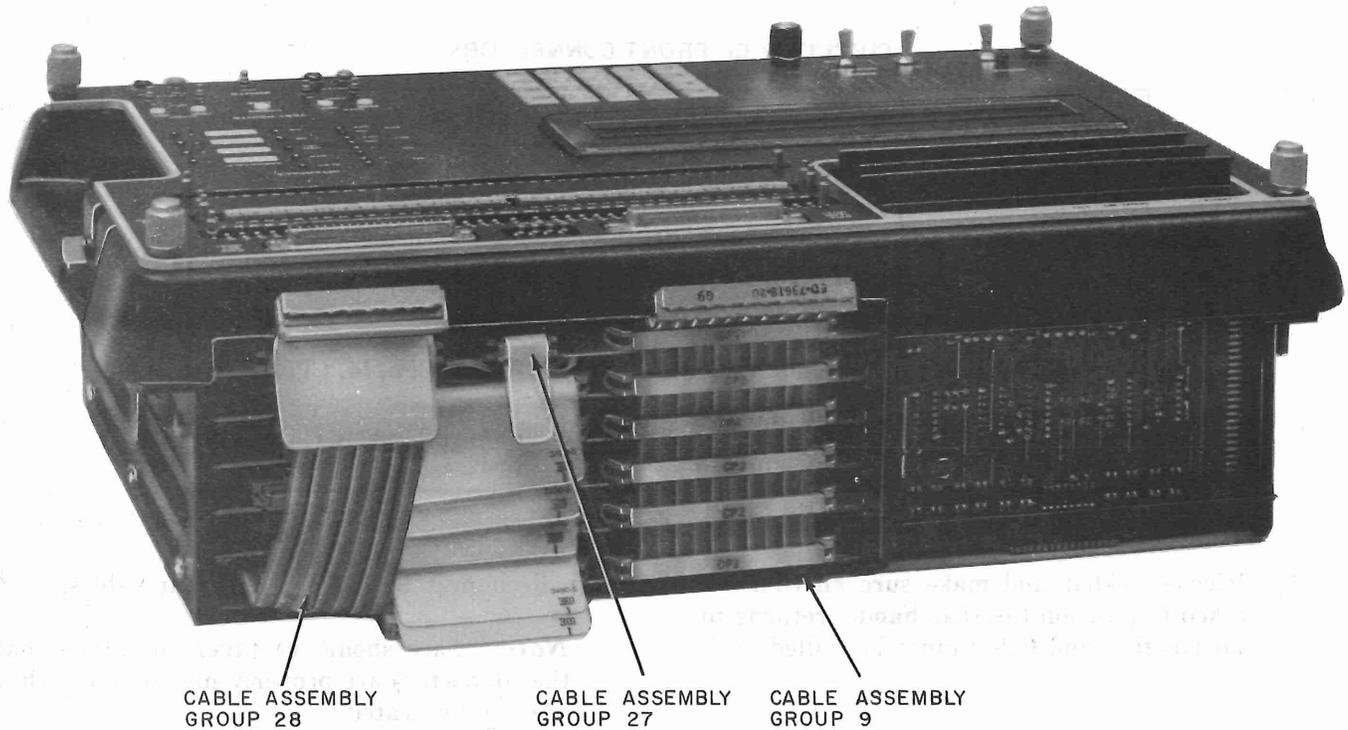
921A DTS (Version 2) Removed From Case—Rear View
